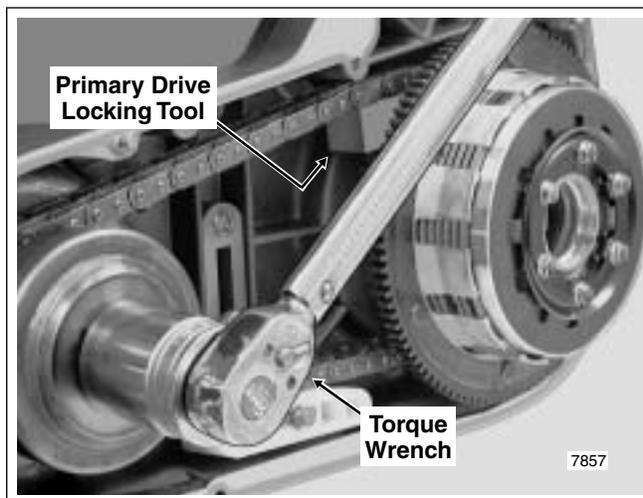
Place Primary Drive Locking Tool and Torque Engine Compensating Sprocket Nut
